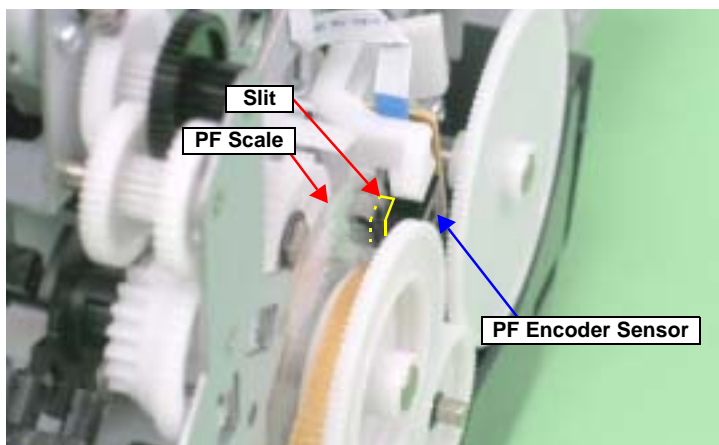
Reinstalling the PF Encoder Sensor Holder
